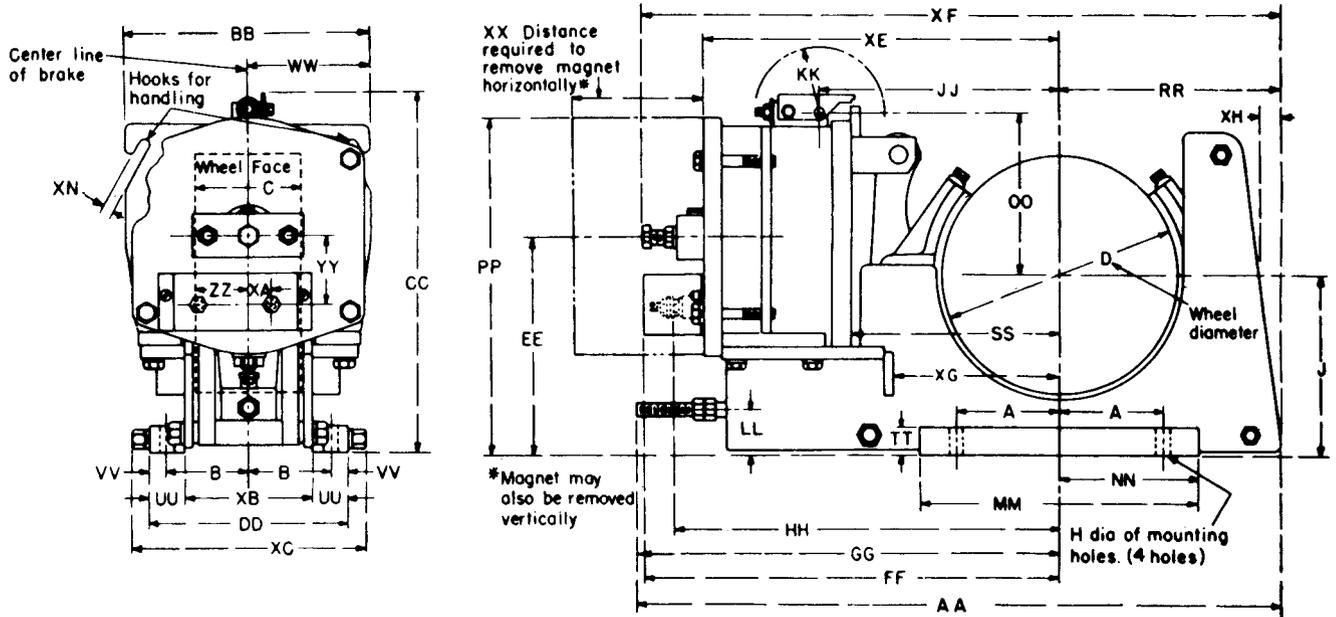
IC9528 brakes, wheel sizes 8 inches through 30 inches
